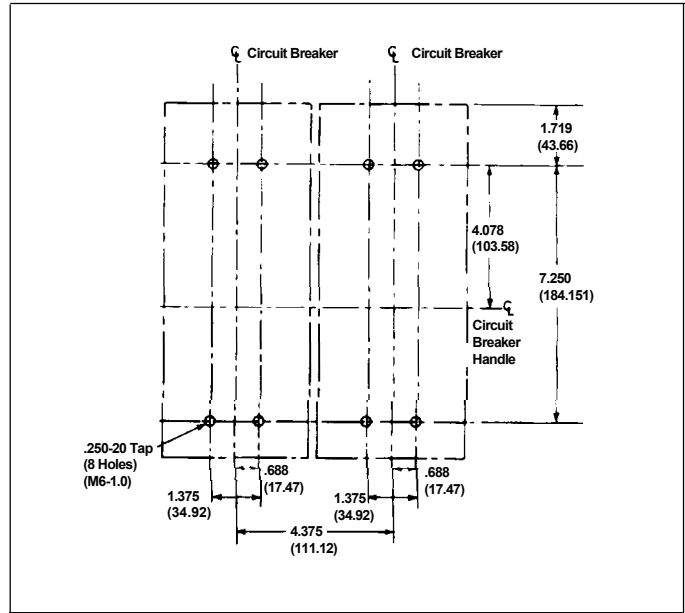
J-Frame Circuit Breaker Mounting Bolt Drilling Plan.
